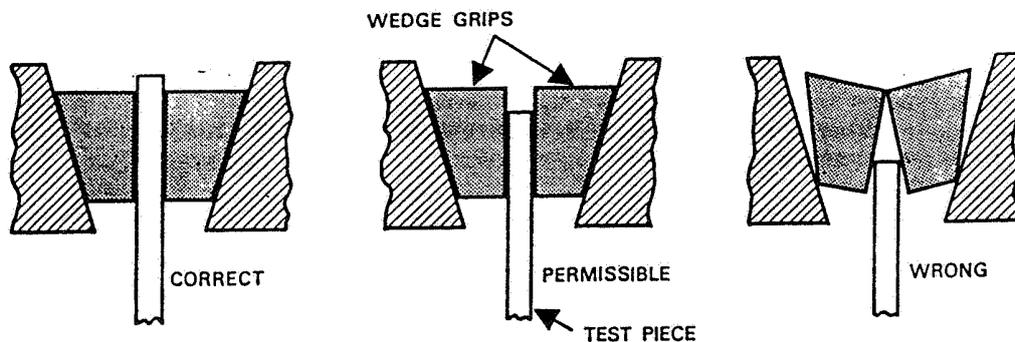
ARRANGEMENT OF WEDGE GRIPS
